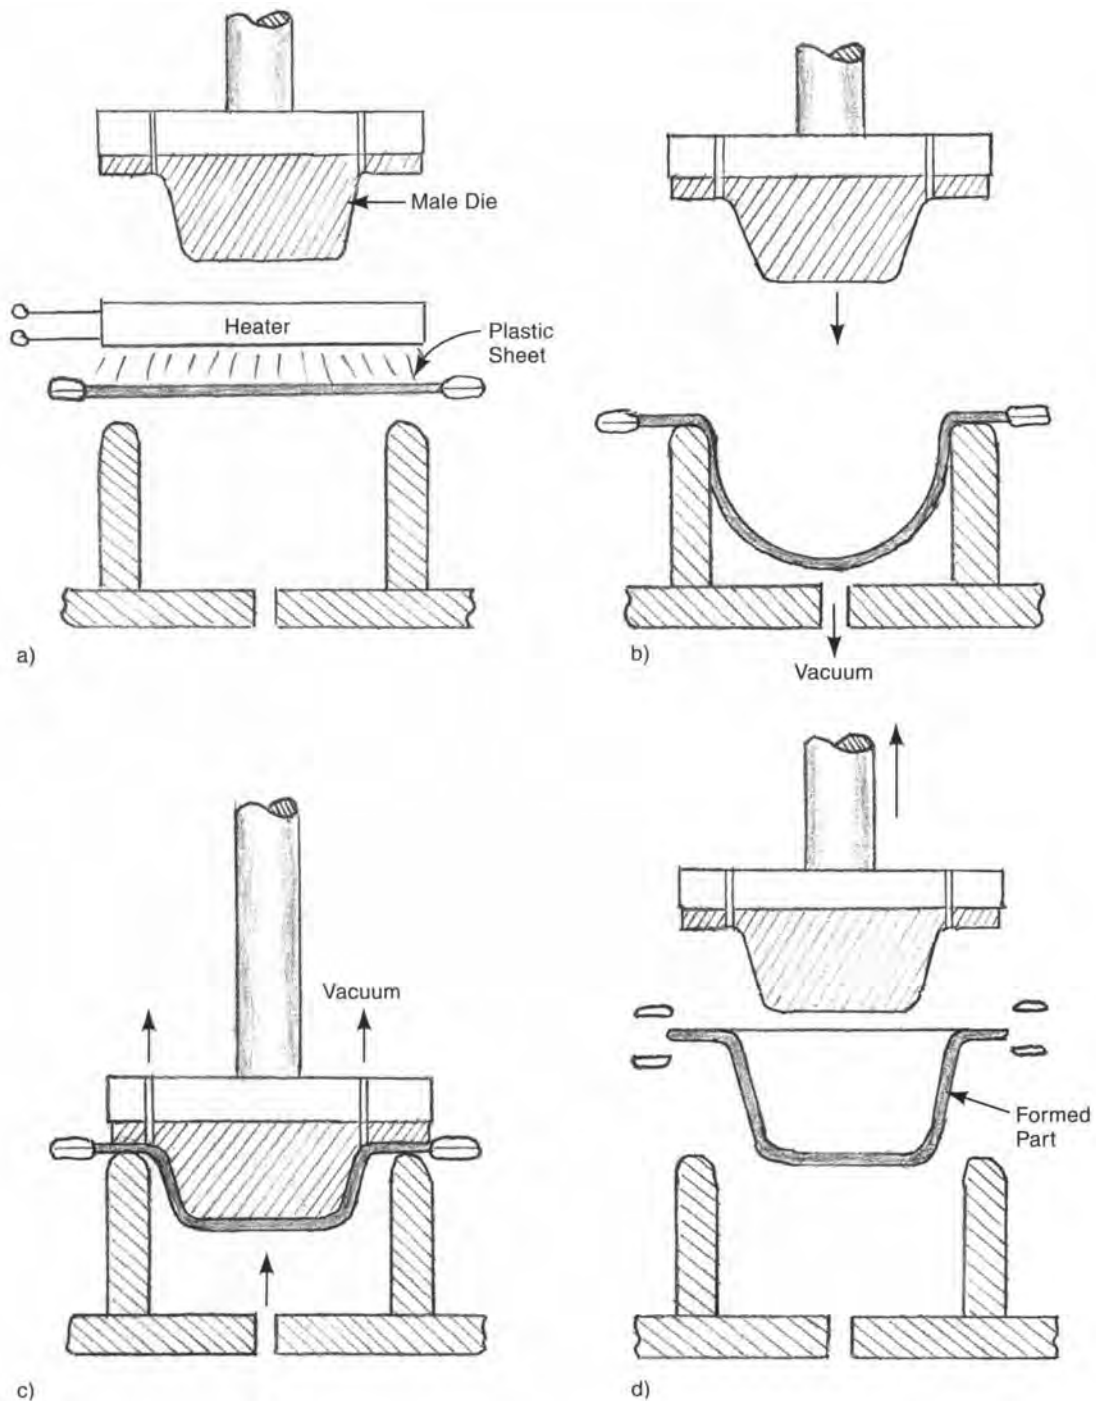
D5 Vacuum snap-back forming. a) The plastic sheet is placed above the mold and is heated. The heater is then retracted. b) The plastic sheet is lowered and sags into the mold, assisted by a vacuum drawn from below. c) The male die descends against the sagged sheet. The vacuum is reversed, drawing the sheet against the male die. d) When the sheet cools and sets to its formed shape, the mold is opened and the formed part is removed.
